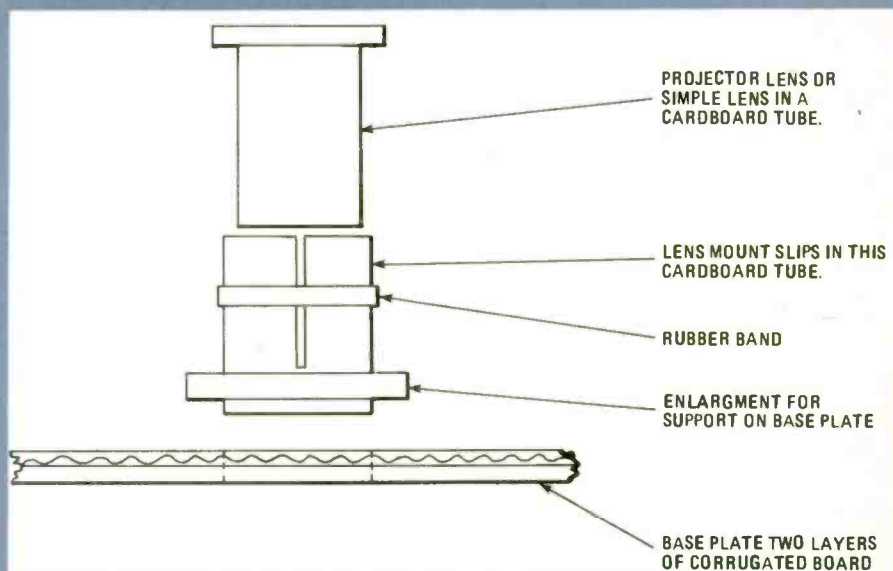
A lens from a slide projector can be held in place by a cardboard tube wound tightly around the lens. That assembly is placed inside another cardboard tube and held in place by friction, supplied by a rubber band.
